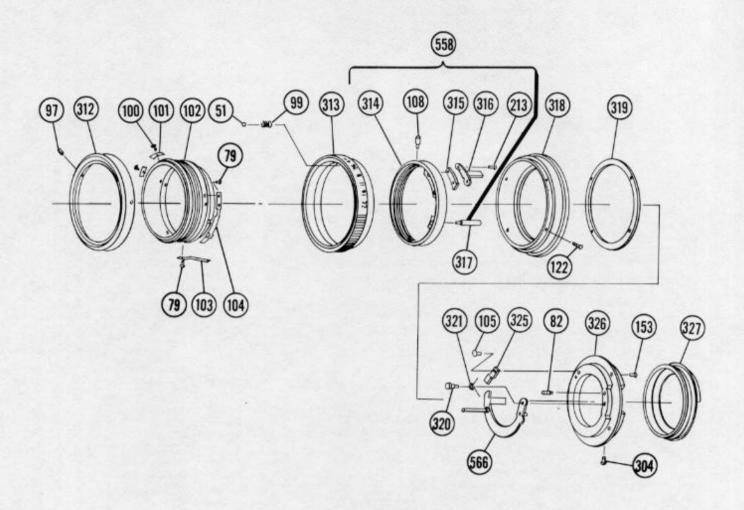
Mount Assembly, Pentax K (Ref. 567, Pg 58)
